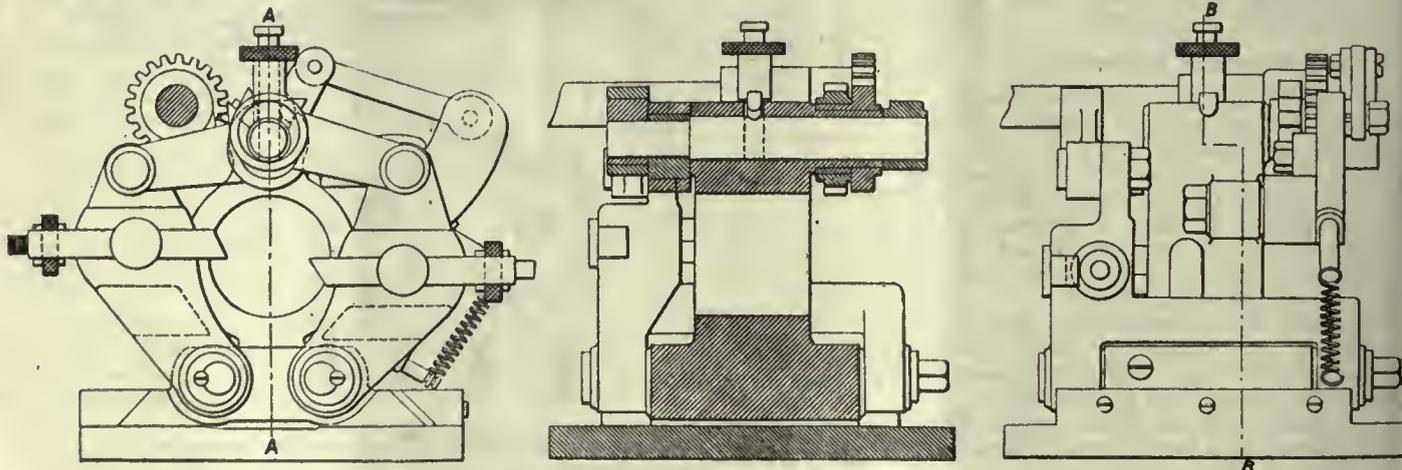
LEFT HAND VIEW. FIG. 2—LONGITUDINAL SECTION. FIG. 3—FRONT VIEW.
